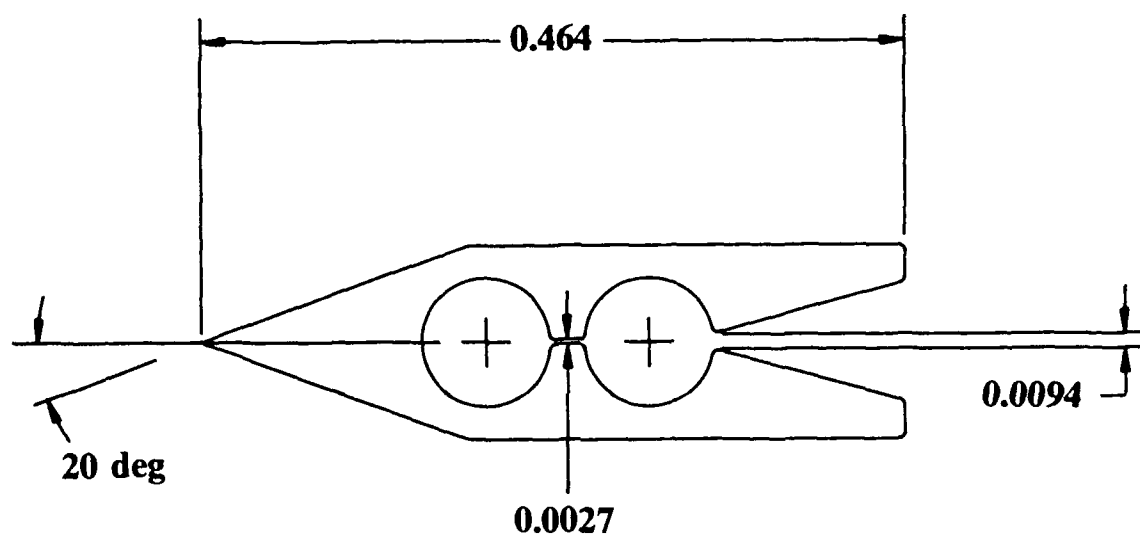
Side view of slit iodine injection nozzle. Double plenum is present to provide even flow across the 2-in nozzle length. All dimensions are in inches.
